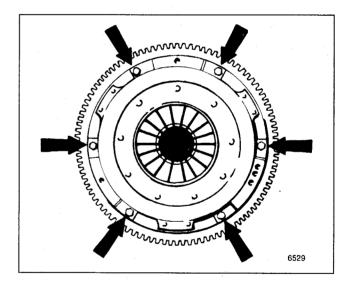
Clutch pressure plate mounting bolts (arrows).
